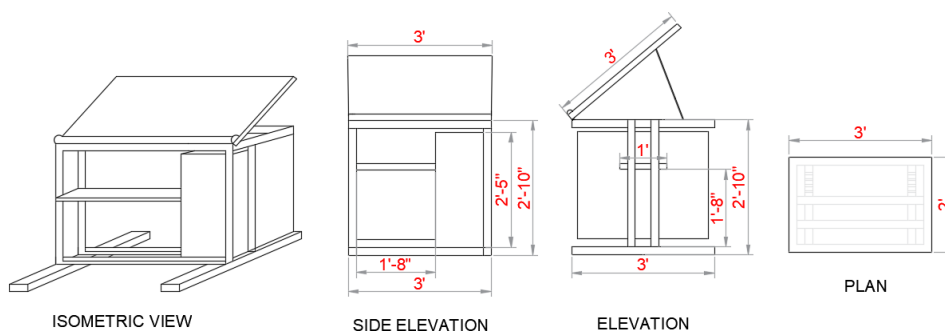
Drafting Table Type B — Dimension study (plan, front elevation, side elevation).
